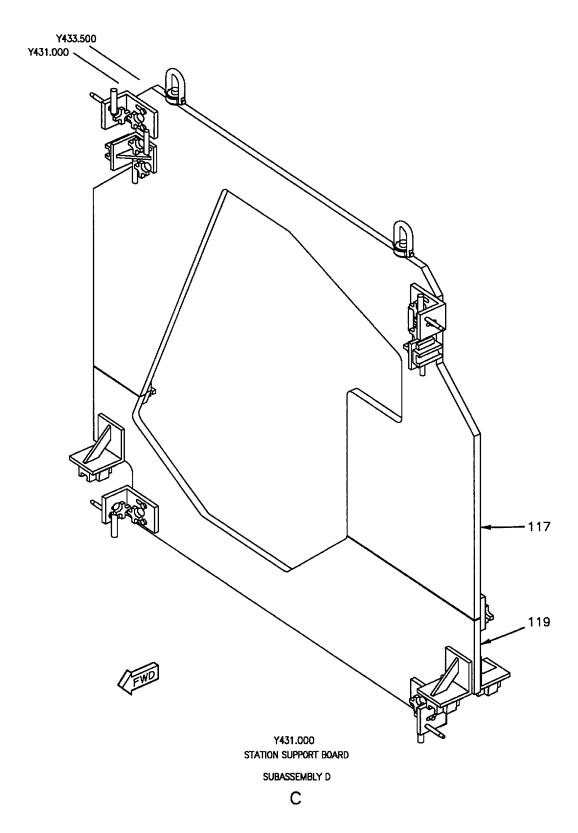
Engine Air Inlet Maintenance Fixture; RE174322020-1 (Sheet 4)
